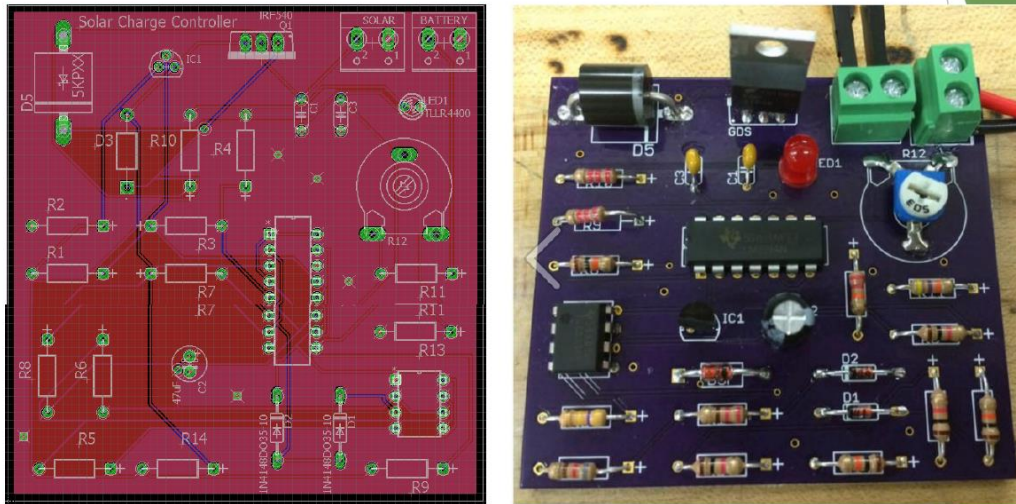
PCB Board Design in EagleCad and final board result
